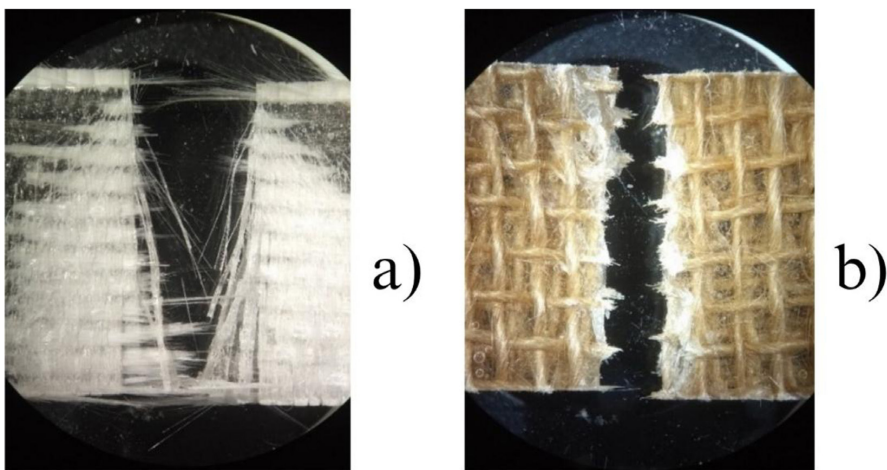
Fracture aspect of the composites (a) GGG and (b) JJJ.
